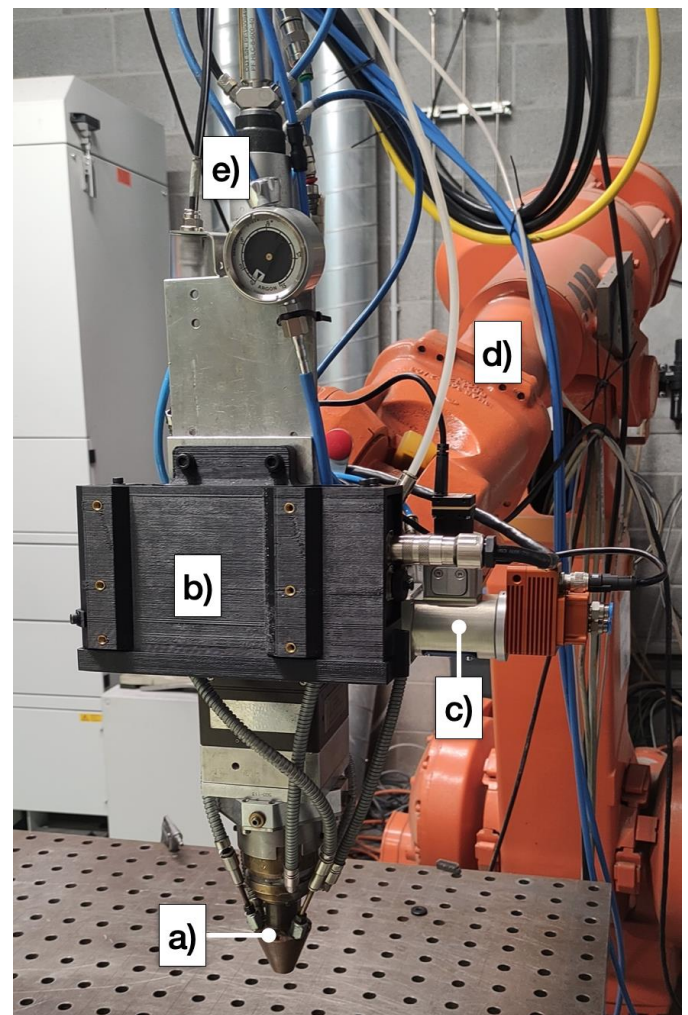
Experimental setup. Industrial robot and end of the arm tooling components: a) powder nozzle mounted on a precitec optical head, b) Gocator laser line scanner, c) coaxial camera module with a coupled MWIR camera, d) 6-AXIS ABB robot and e) laser fiber input.
